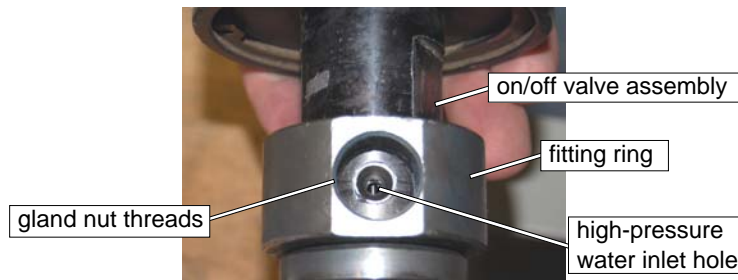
Aligning the Gland Nut Threads with the High-pressure Water Inlet Hole
